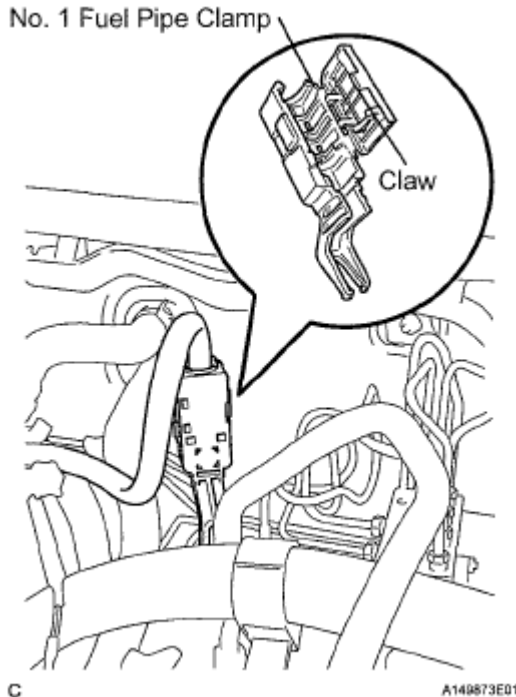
Identifying No. 1 Fuel Pipe Clamp
